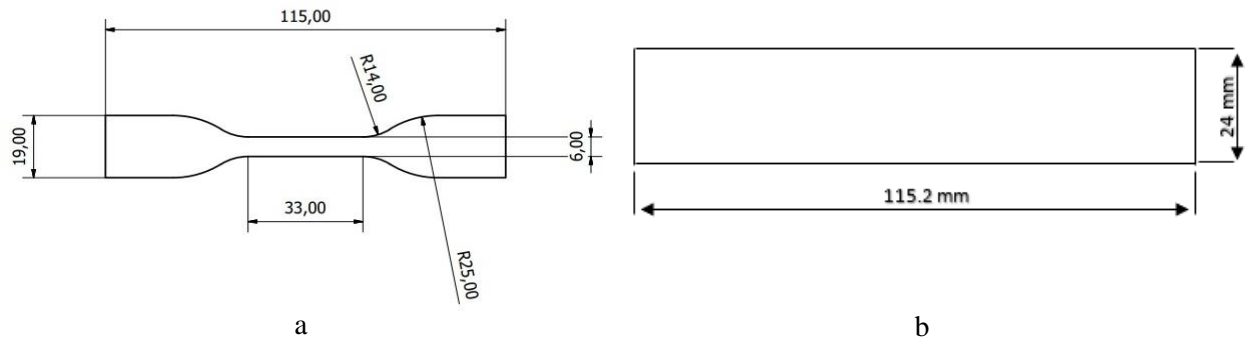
(a) Tensile test specimen ASTM D638 type IV, (b) bending test specimen ASTM D79-0
